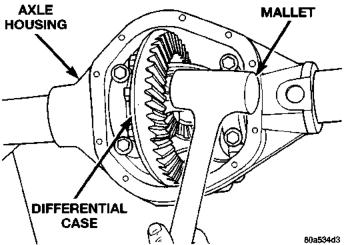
Seat Ring Gear Side Differential Dummy Side Bearing
